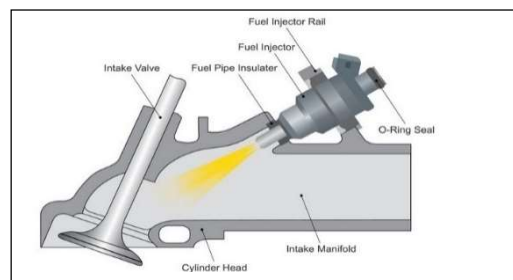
Fuel Injector Assembly on a Gasoline Engine. Retrieved from: <https://jbrsurplusautoparts.com/blogs/news/fuel-injection-how-it-works>
